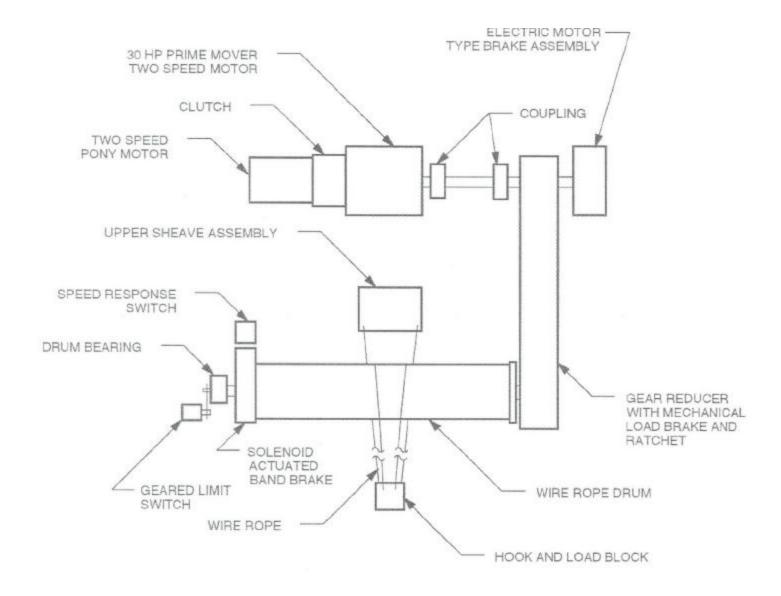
30-Ton Bridge Cranes, Hoist Assembly
